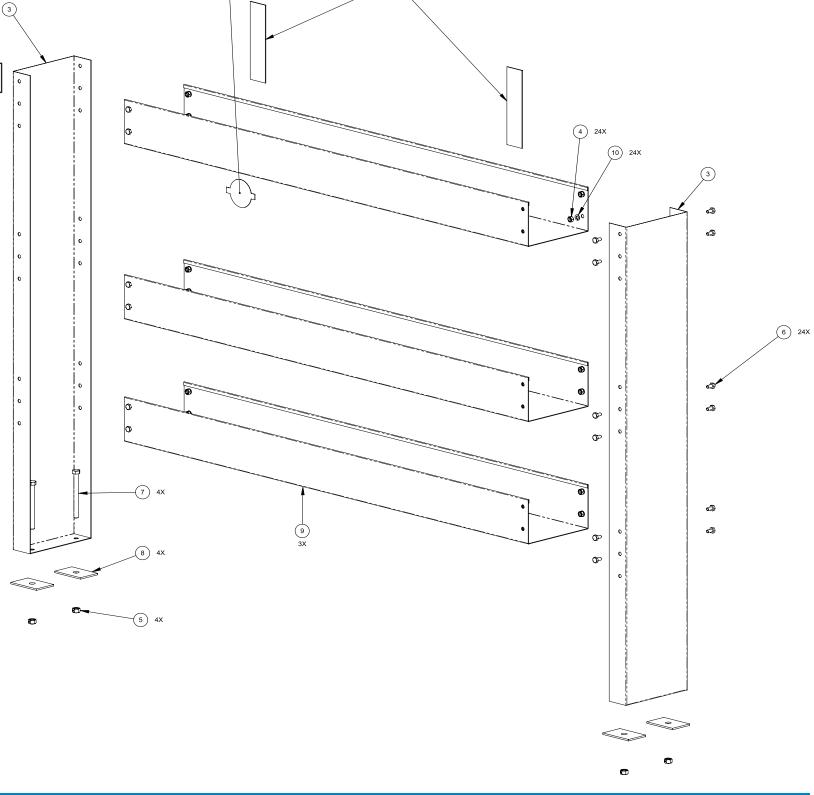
3 Tier Stainless Steel Shelf Assembly
